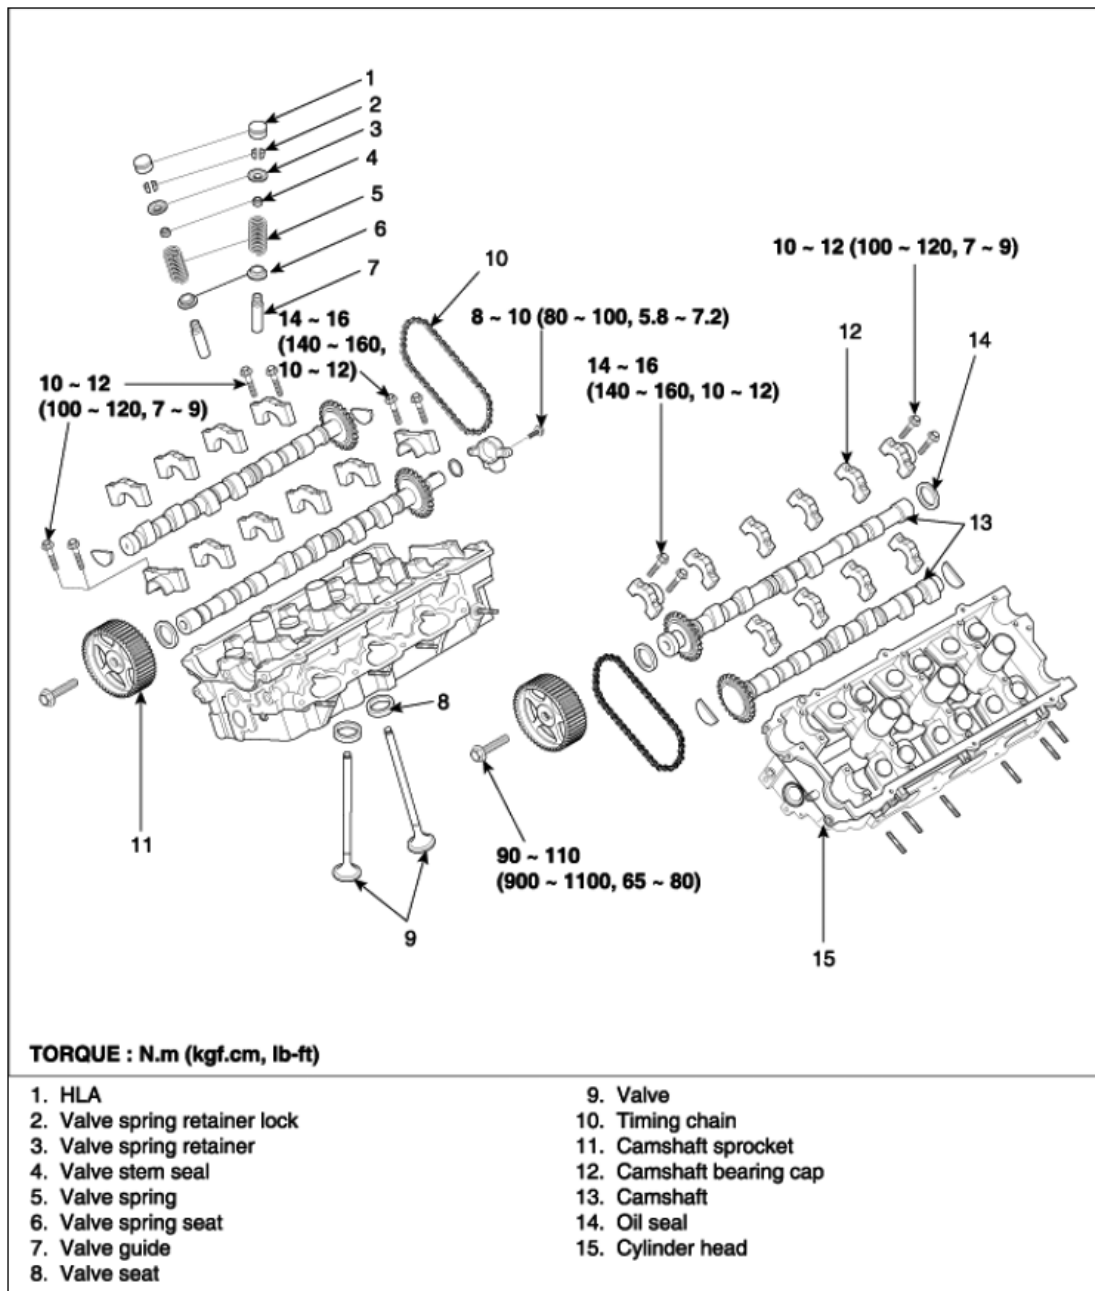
Identifying Valve And Camshaft Components With Torque Specifications
